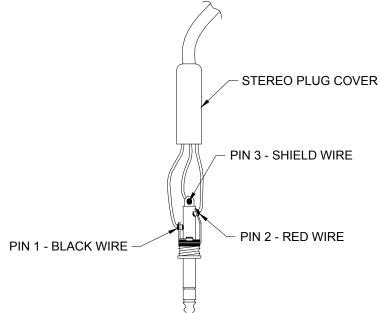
1/4-inch Stereo Plug Wiring Diagram
